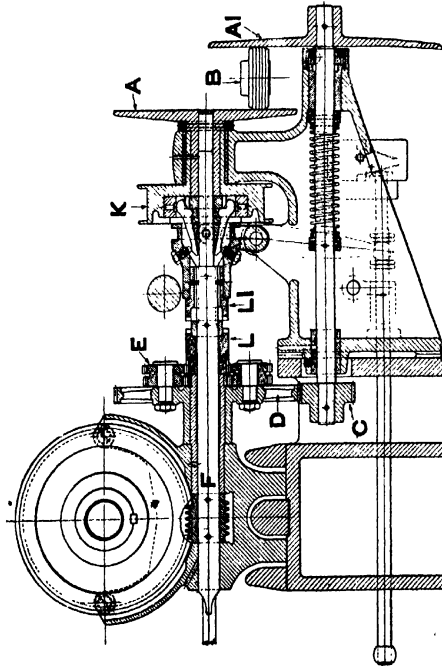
Mechanism of Cleveland automatic screw machine.
